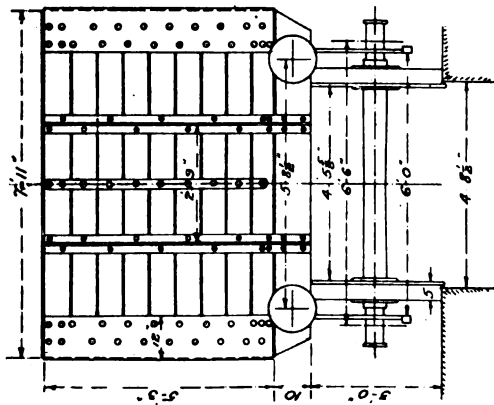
END ELEVATION OF 20-TON WAGON.
